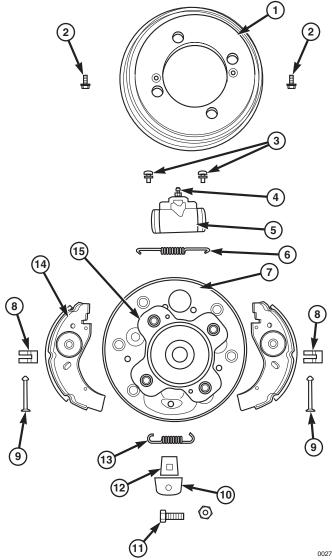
Front Brake Breakdown (* indicates serviceable part)
